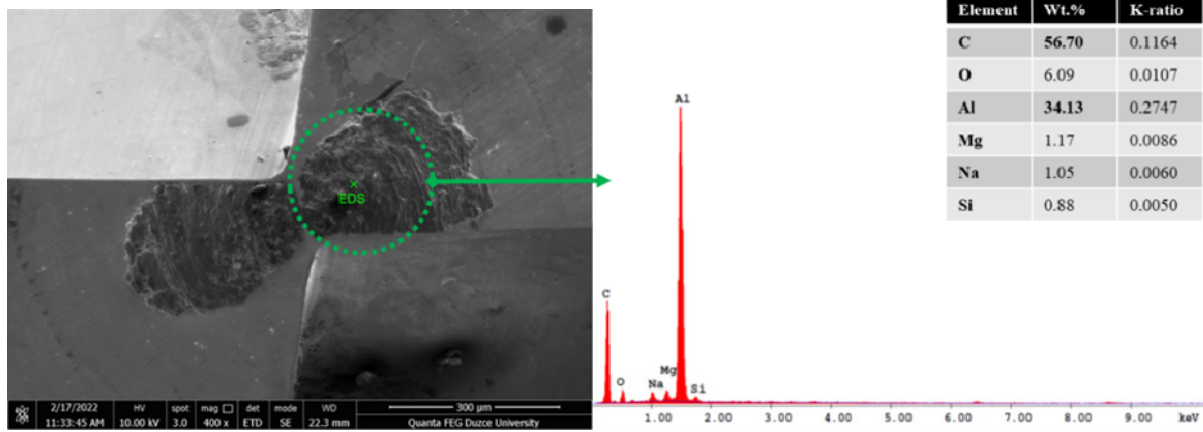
EDS evaluation of the elemental analysis of drill Tool 2 after drilling CARALL composite.
